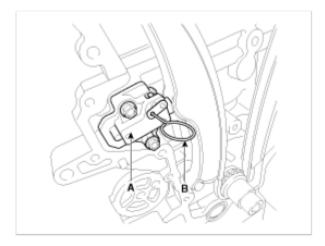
Identifying Hydraulic Tensioner And Dowel Pin Courtesy of HYUNDAI MOTOR AMERICA
